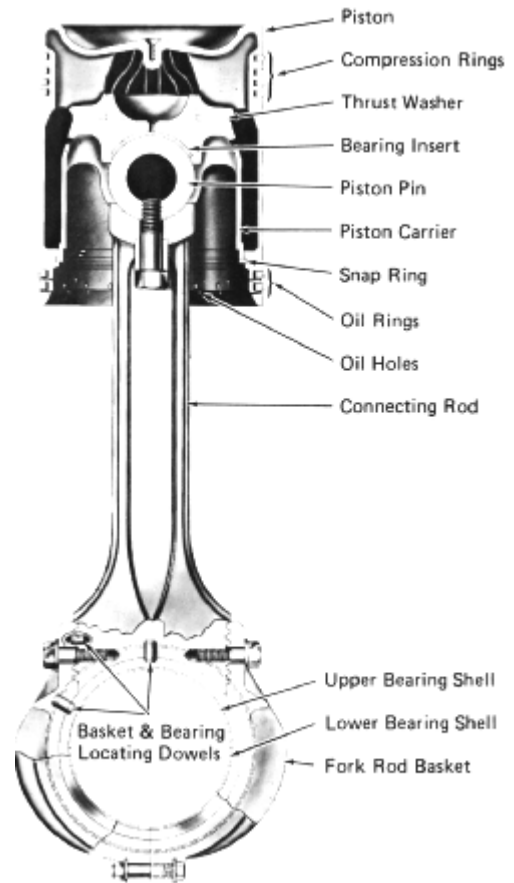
Piston And Connecting Rod Assembly, Cross-Section
